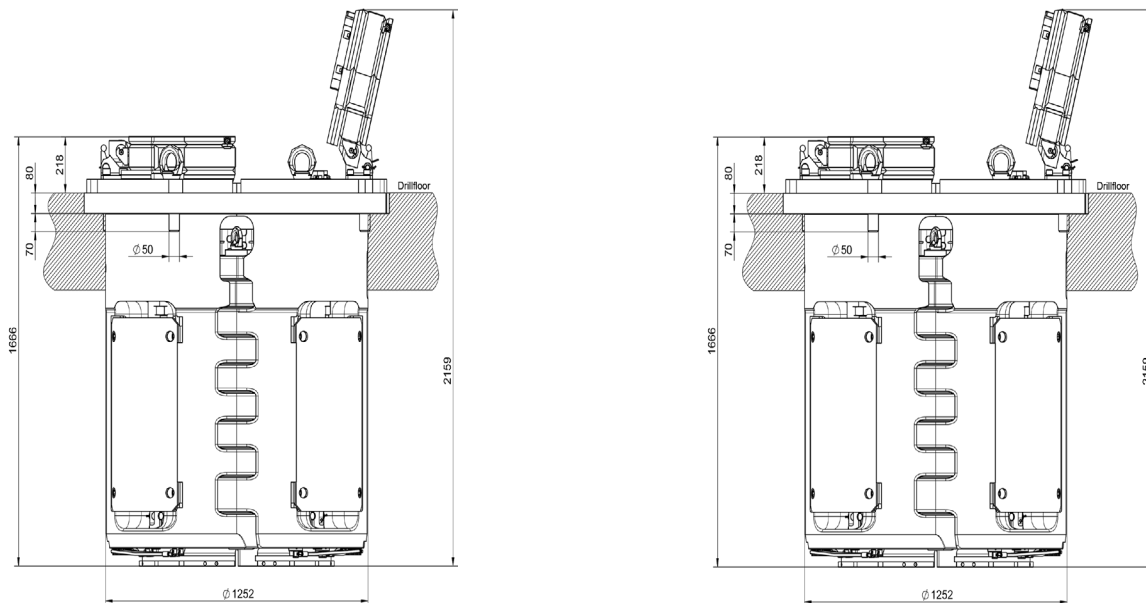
Primary Dimensions (Emsco 49 ½" RT)
